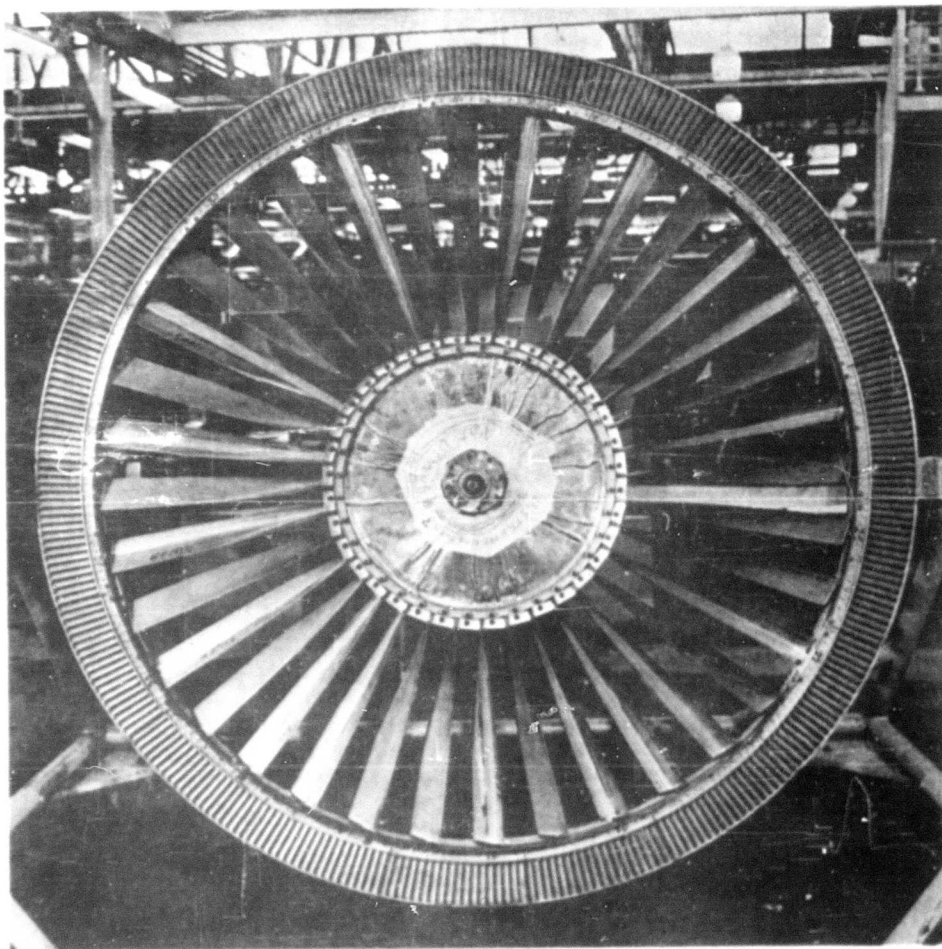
ASSEMBLED ROTOR - BUILD-UP #3-001
